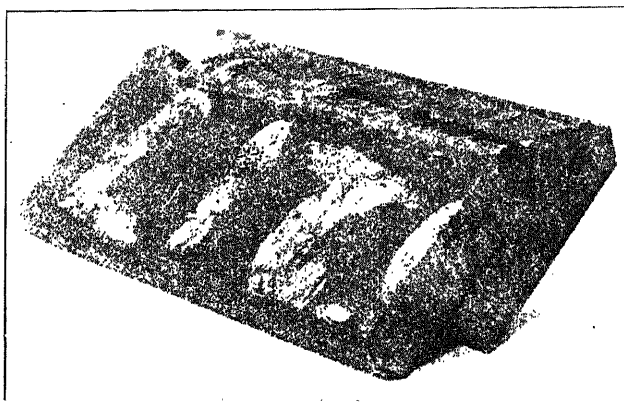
Two  $\frac{1}{2}$ -in. Ship Plates Automatically Welded by Metallic-Electrode Arc Process to Form Lap Joint.
